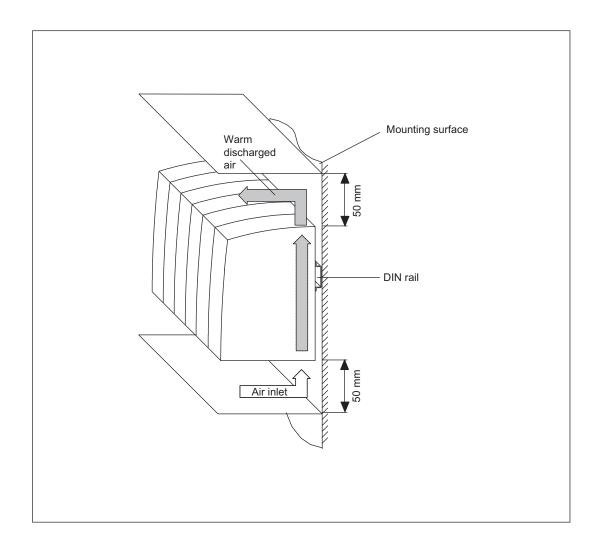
Cooling clearances, rail-mounted modules (e.g. VSM, SMC, TM, DMC)
